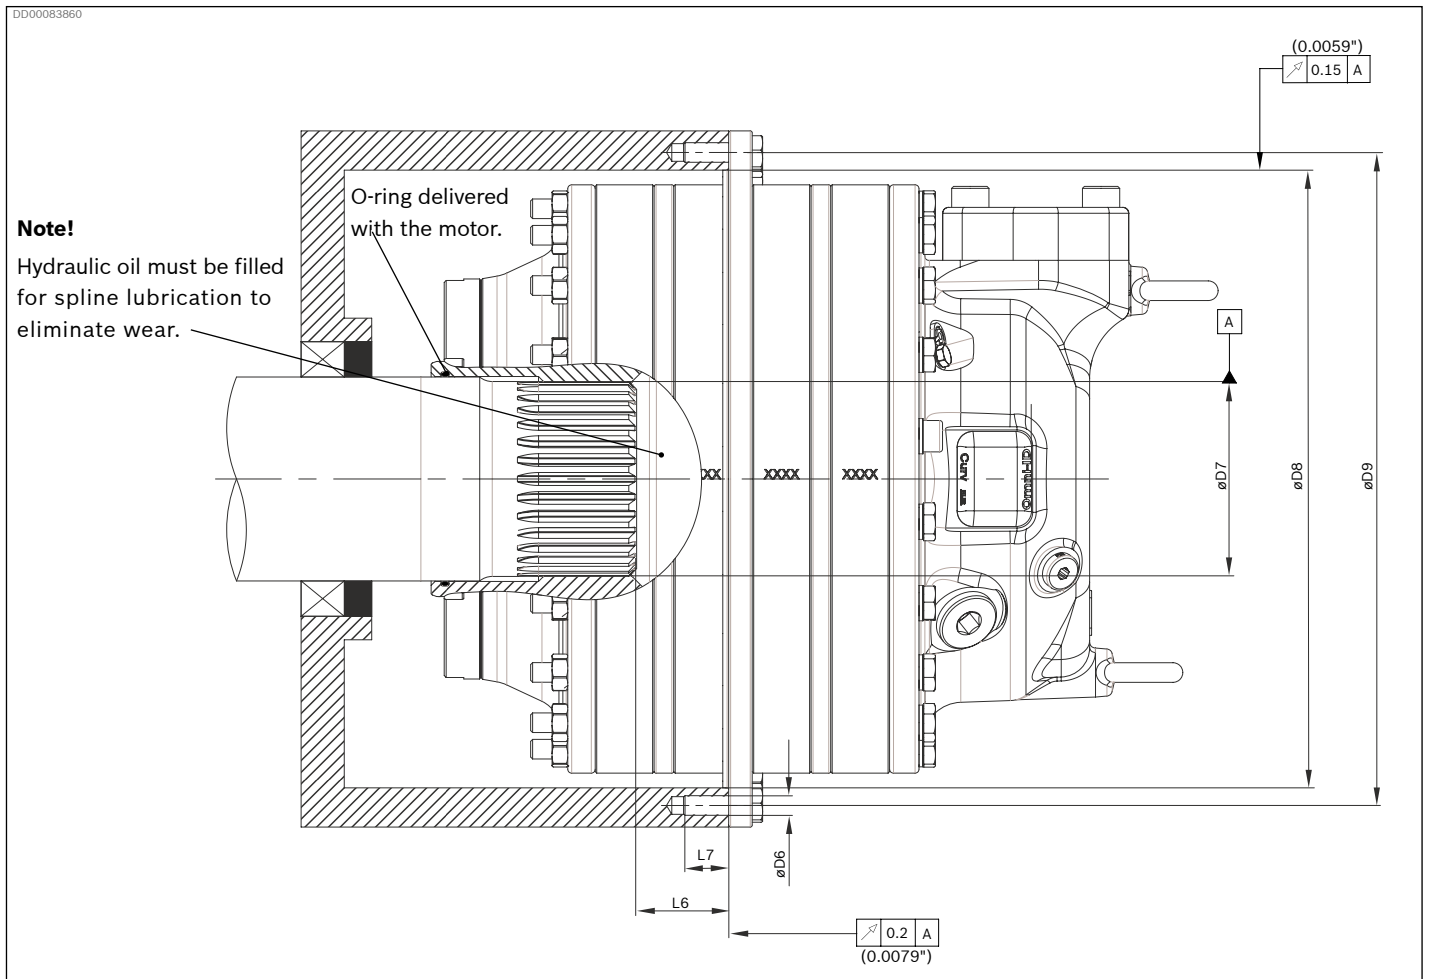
Shaft installation tolerances CAB 30 C (center flange), CAB 40
